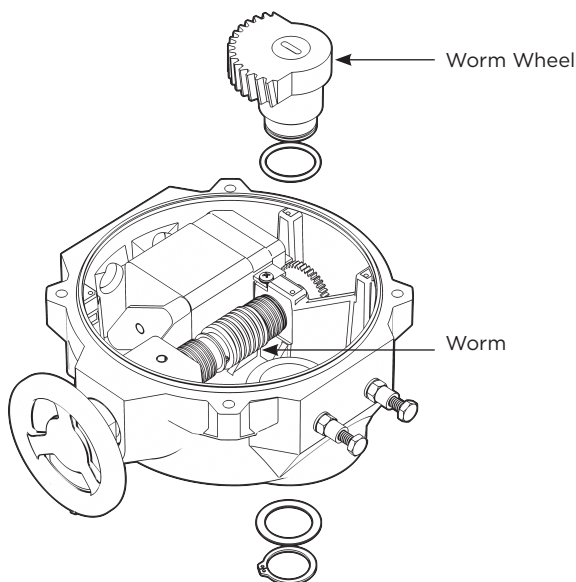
S70, Actuator Size E03, E06, E08 – motor removed.
